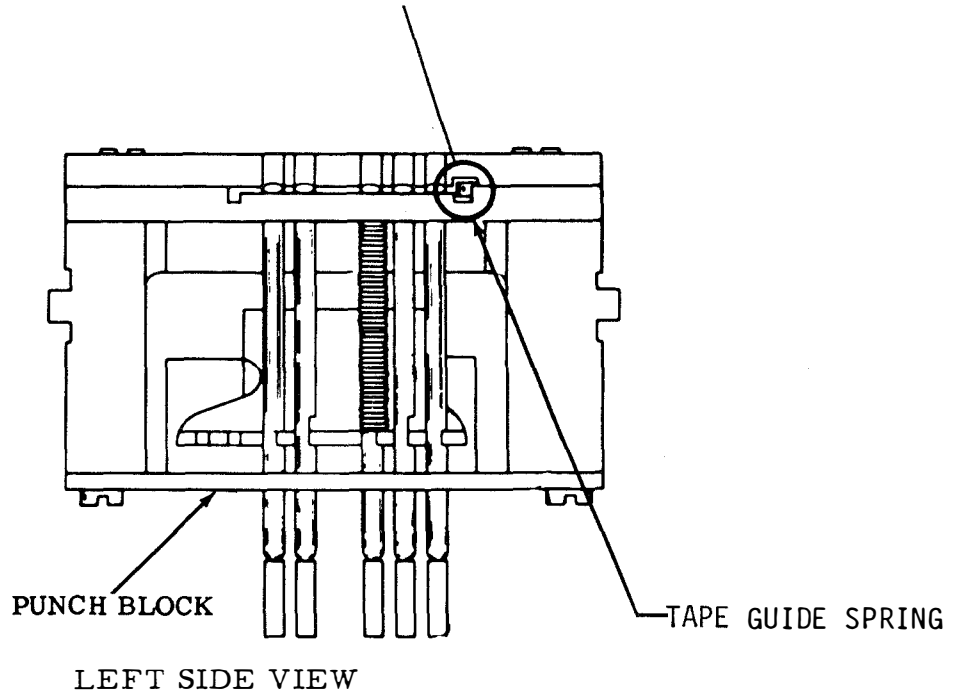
Tape Guide Spring (Chadless Tape Mechanism)
